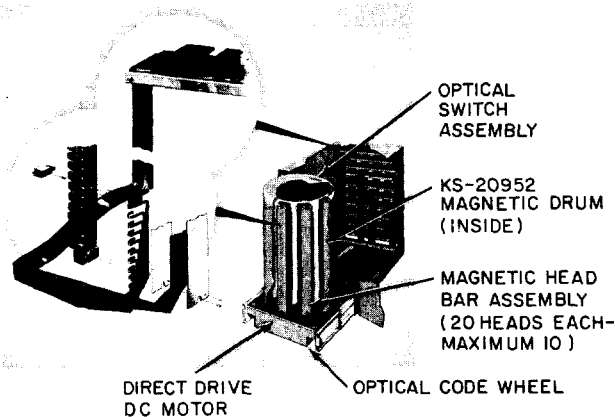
KS-20951 Drum Storage Unit (Cutaway View)
